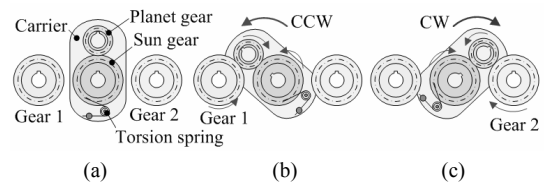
Clutch mechanism based on a planetary gear system: (a) neutral state, (b) mesh with gear 1, and (c) mesh with gear 2.
